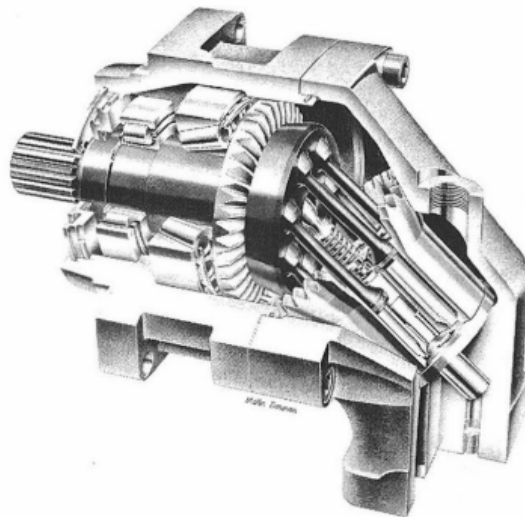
Axial piston machine of bent-axis type. Picture source: [21].
